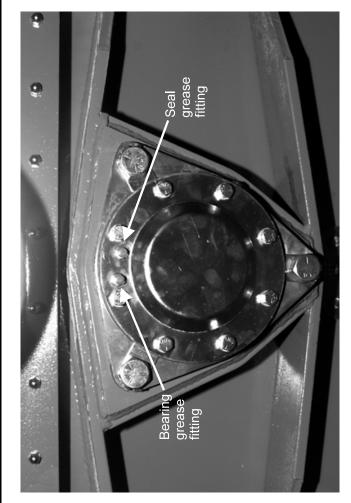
(MSSM0201CE) 42" Divided Cylinder Front Bearing and Seal Grease Fittings
